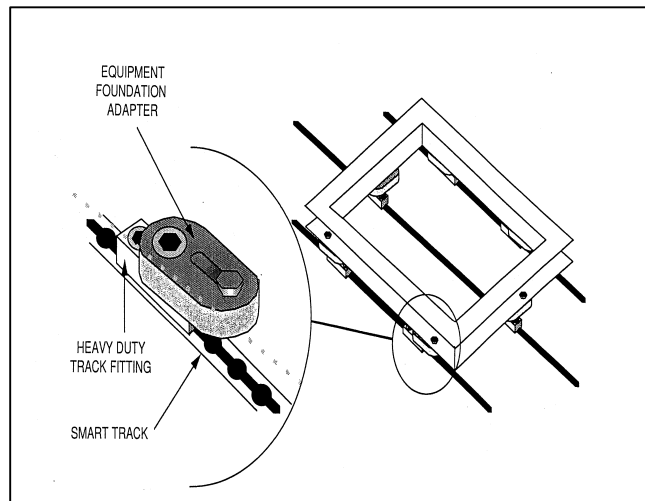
Medium/Heavy Weight Attachment and Fitting Assembly
